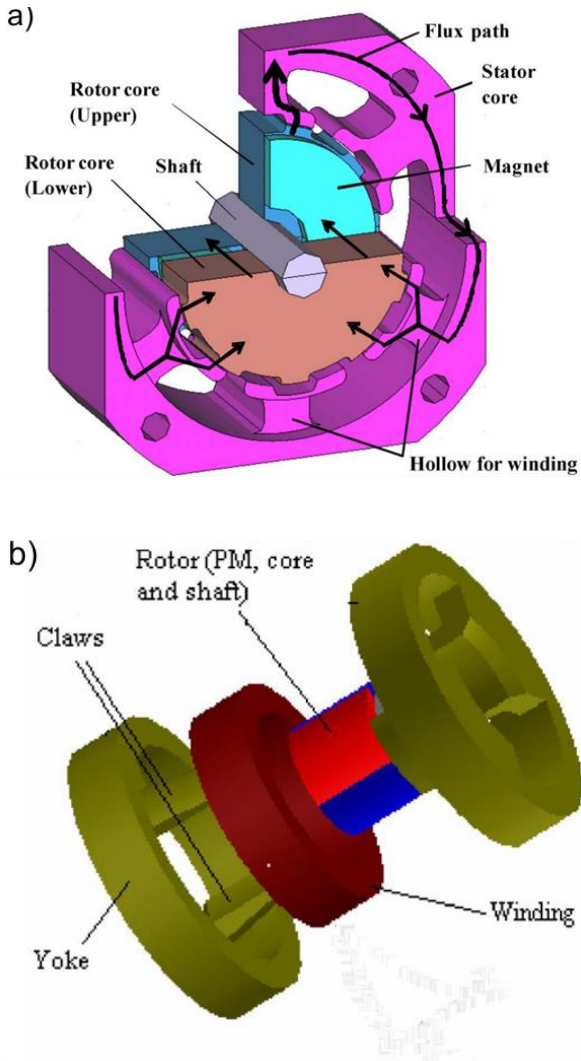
a) Brushless DC motor [23], b) claw pole motor [24].
